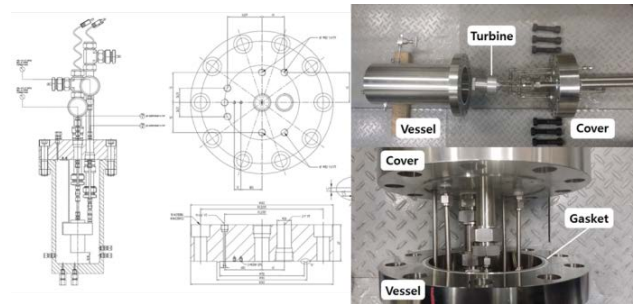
Design drawings and feature of pressure vessel for Tesla turbine test
